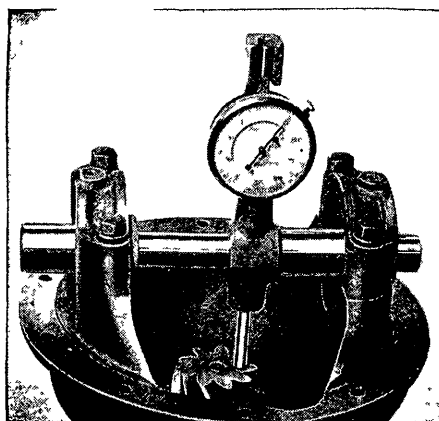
"Dialocator" as used with spiral bevel gear installation
